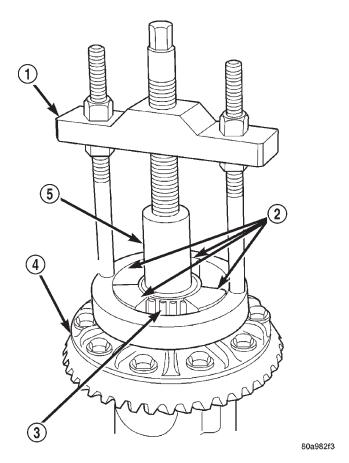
Differential Bearing Removal—9 1/4 Axle
